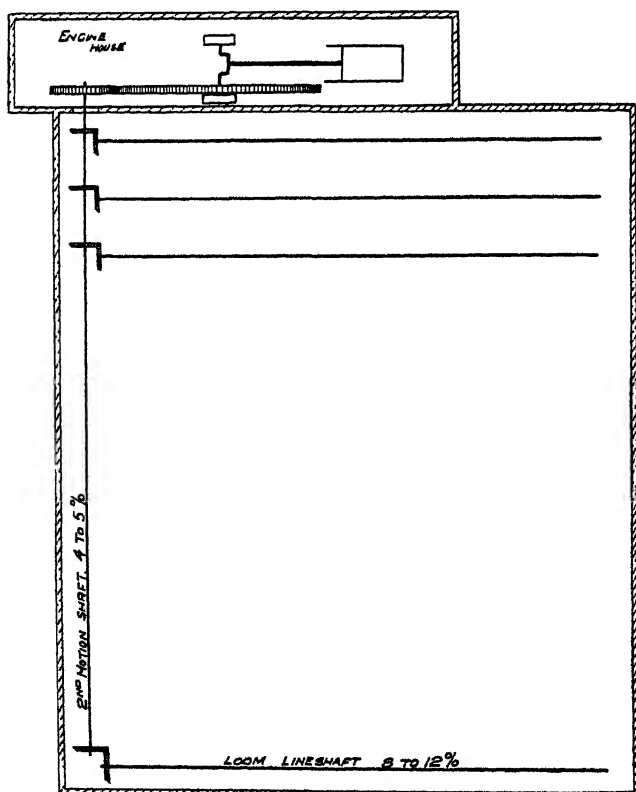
SKETCH PLAN OF WEAVING SHED.
